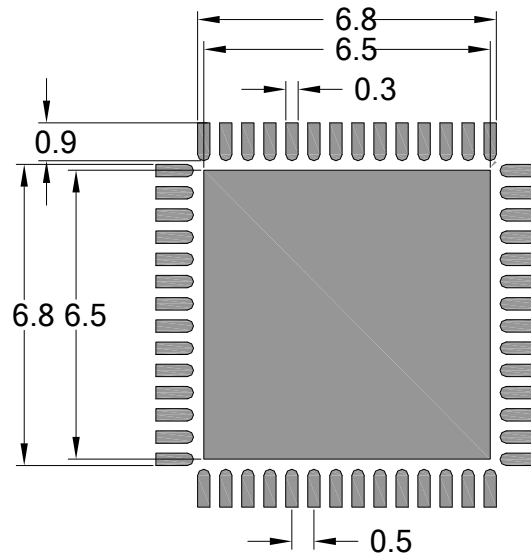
PD69204T4 Top layer Copper Recommended PCB Layout (mm)
